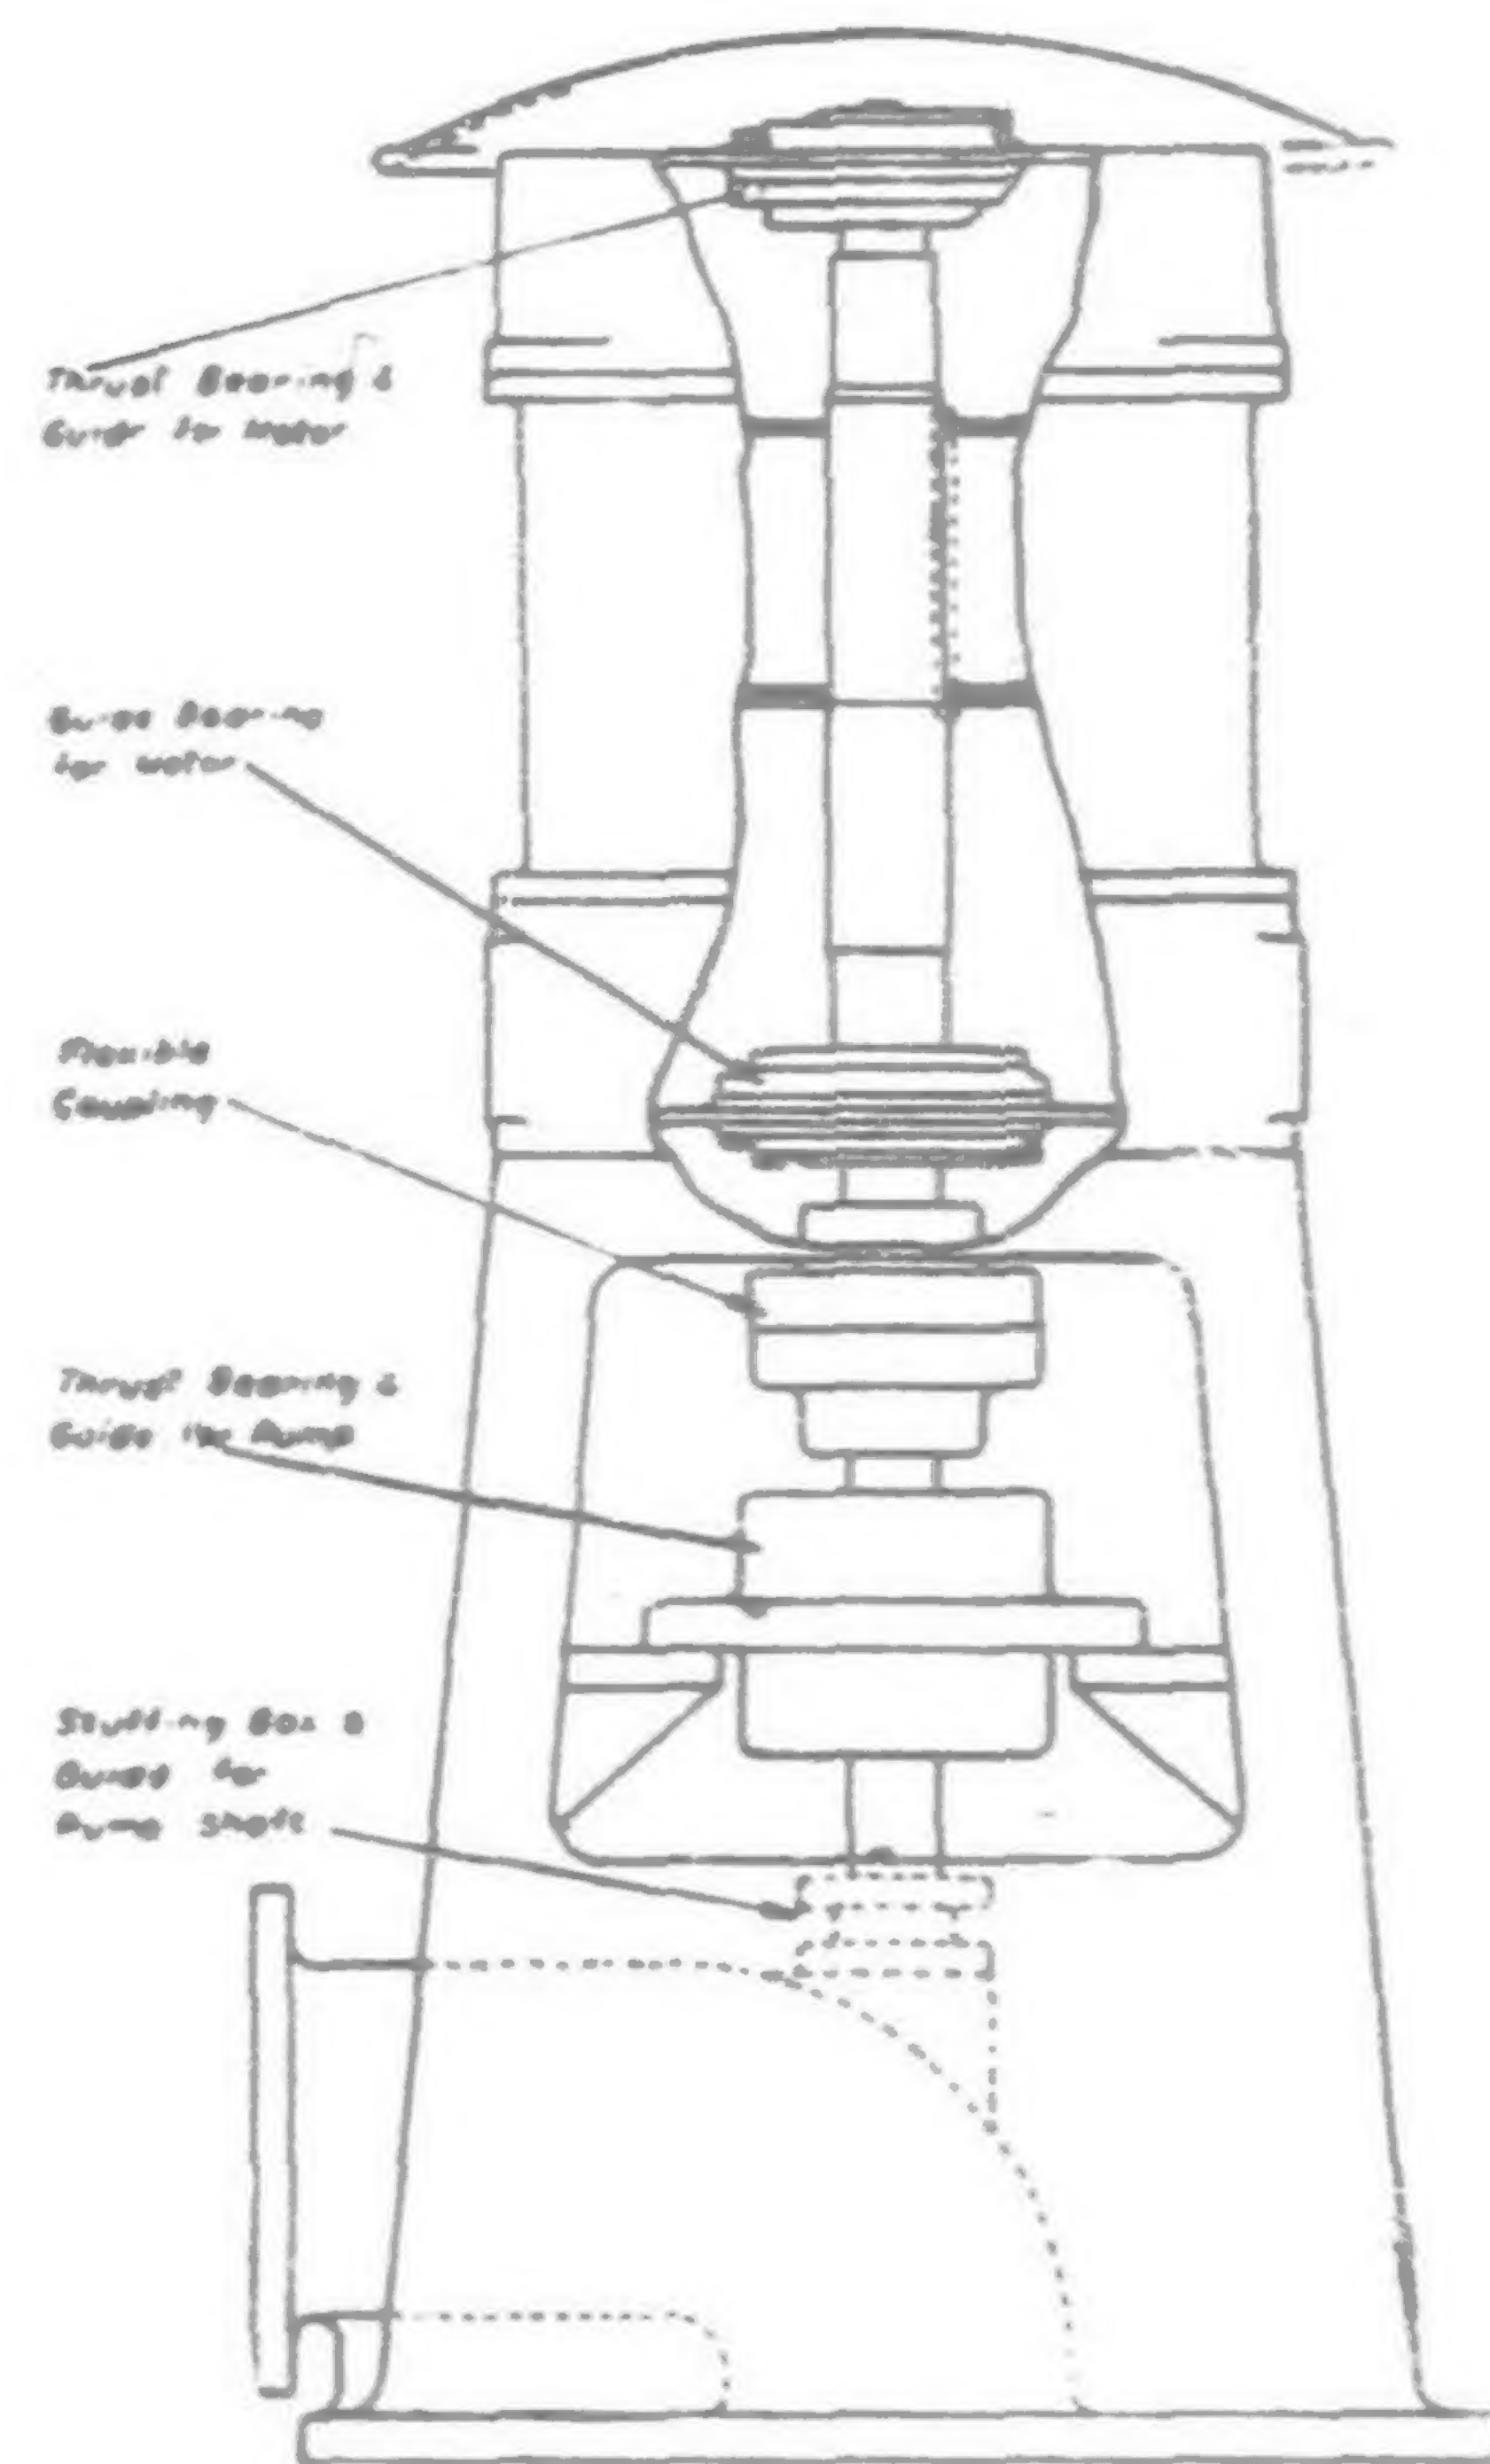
Arrangement of 50 h.p., 1,500 r.p.m. Solid Shaft Motor on Pump Head with Separate Flexible Coupling and Bearing for Pump Thrust
